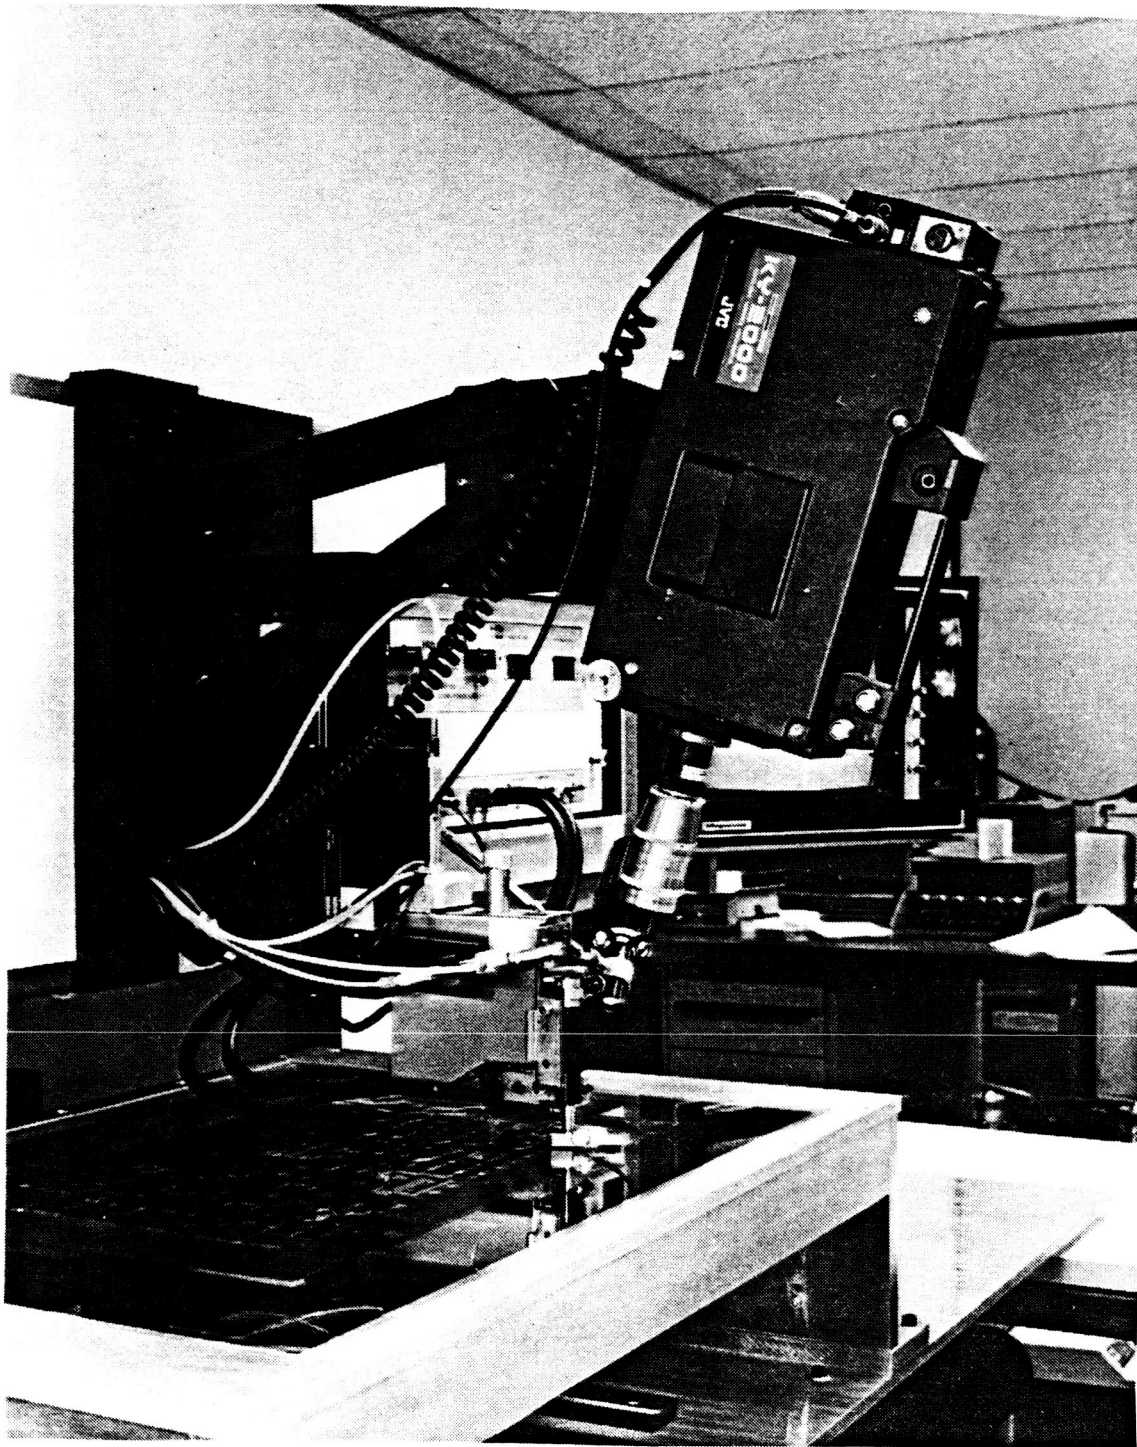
Welding of Copper/Kapton Interconnect
